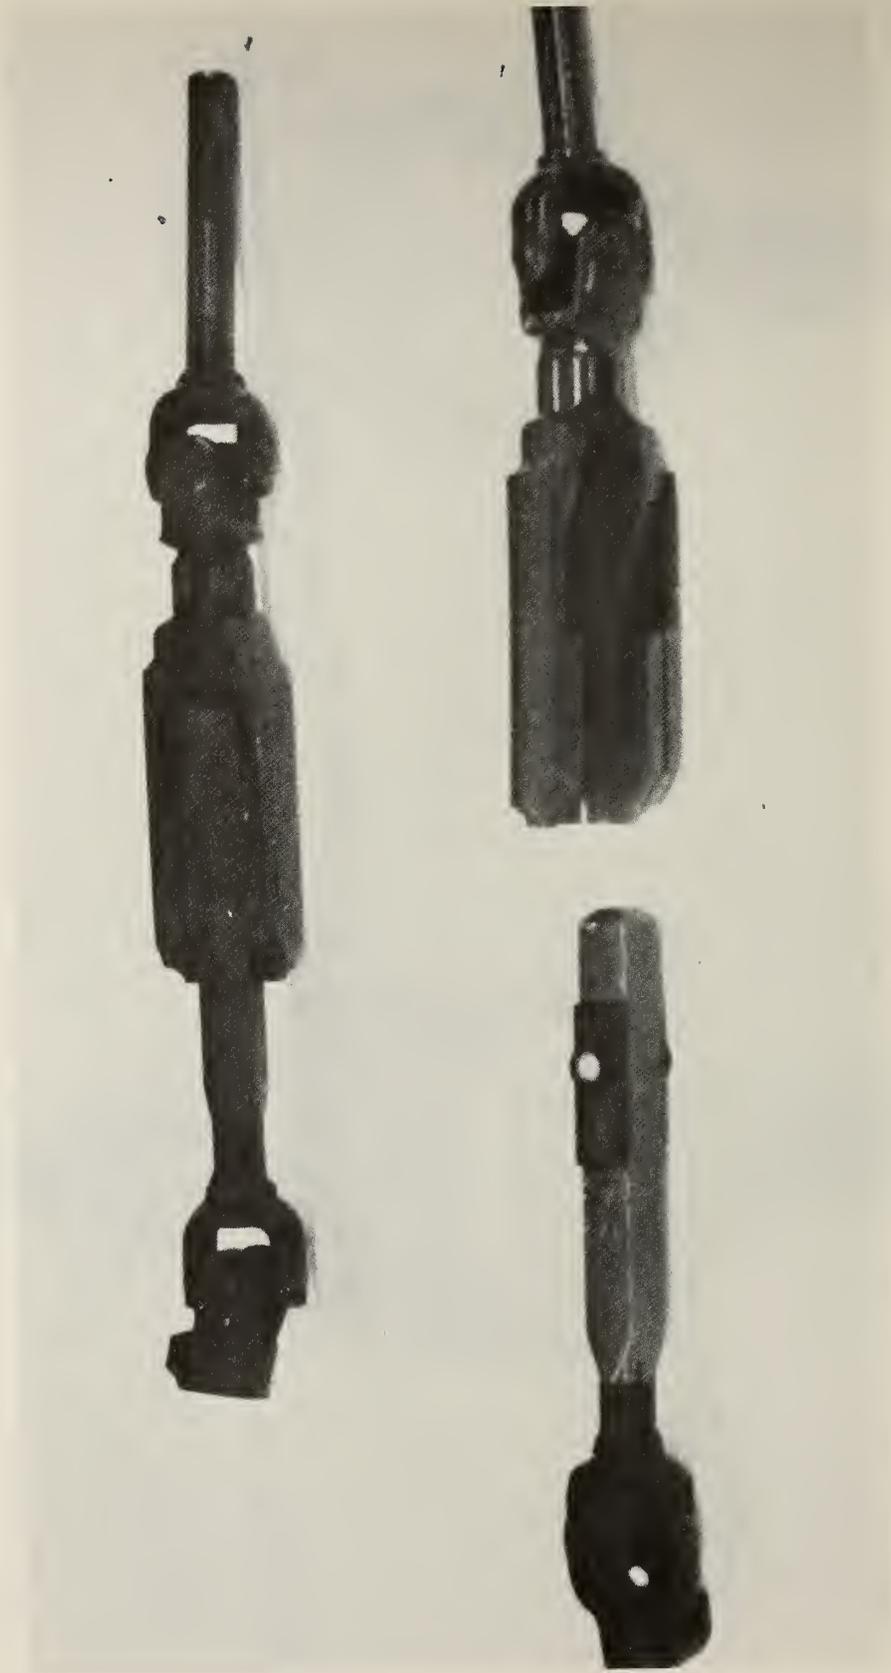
DE-COUPLING INTERMEDIATE STEERING SHAFT
